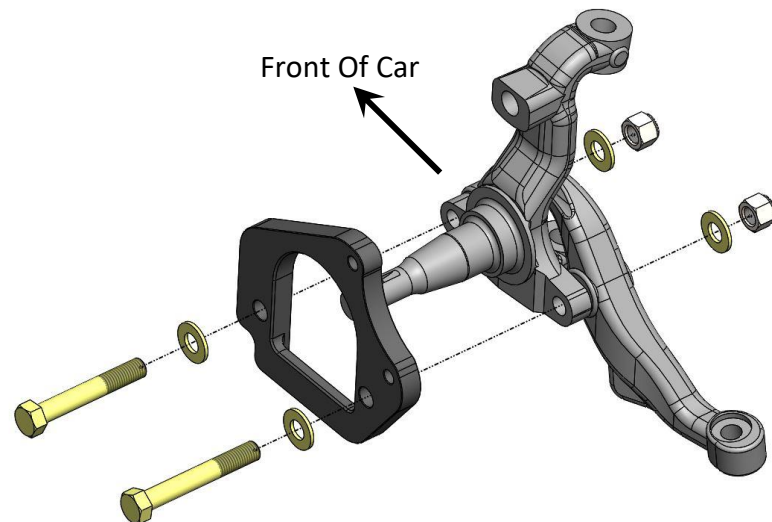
Primary Caliper Mounting Bracket Installed (Driver Side F-Body Spindle Steer Arm Shown Above)
